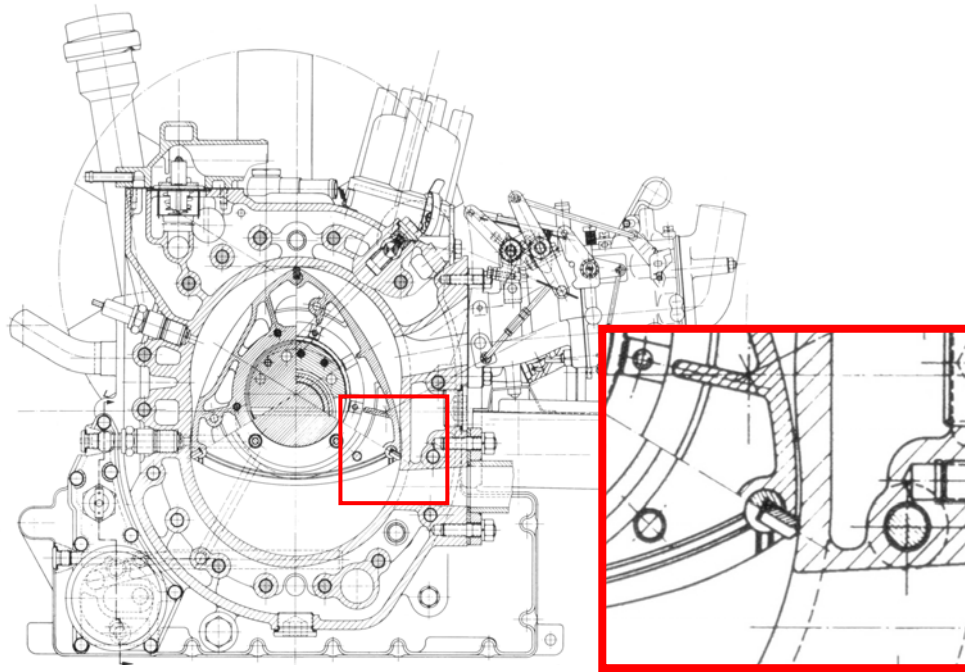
Section drawing of the Ro 80 engine (rotor tip seal highlighted) [Korp 1993]
